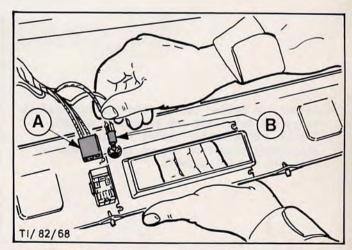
Pull off blower switch multi-plug, A, and detach symbol illuminating bulb and holder, B.
